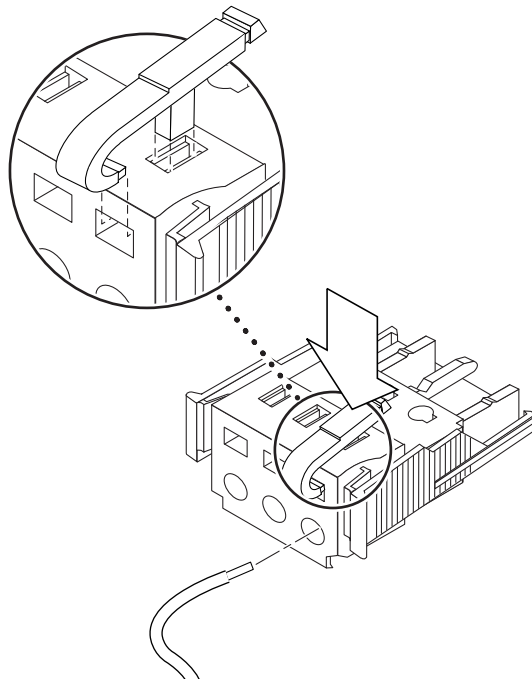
Opening the DC Connector Cage Clamp (Lever Method)
